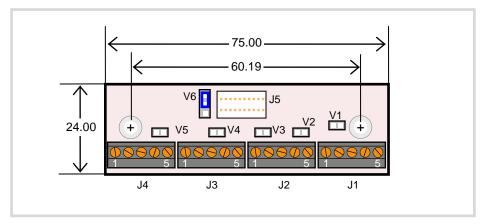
VL-CBR-2004 Dimensions, Connectors, Jumper Blocks
